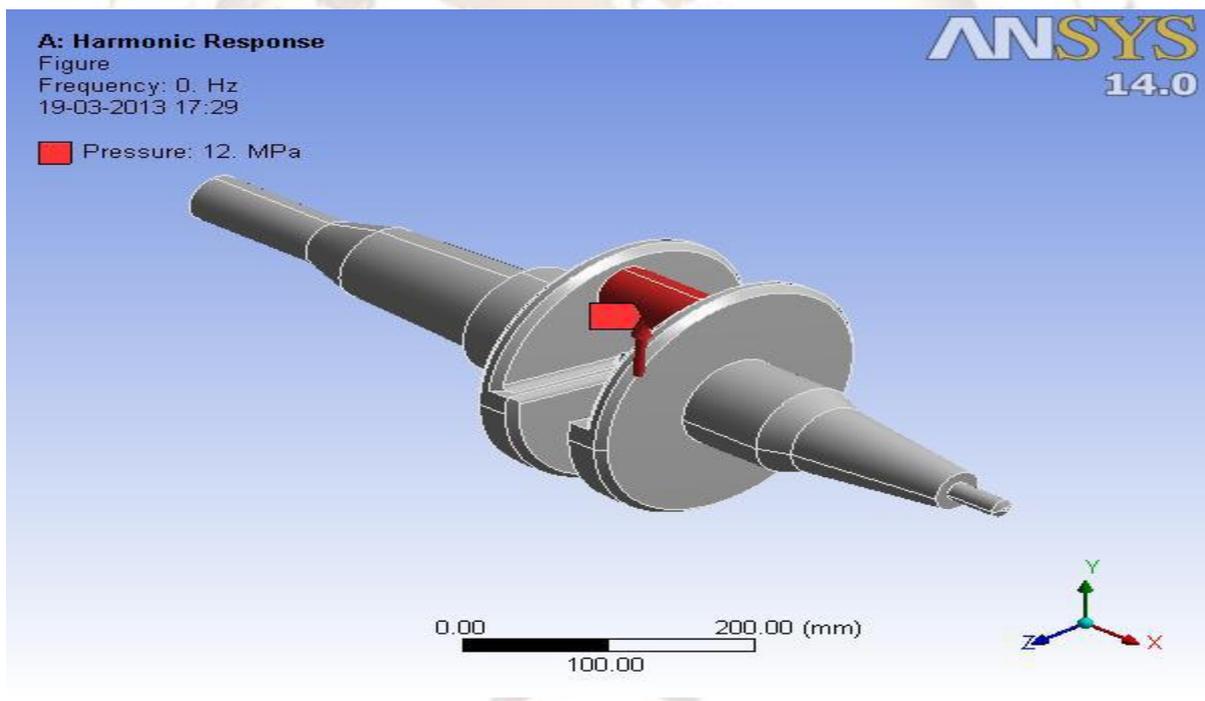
, Geometric model of crankshaft of single cylinder SI Engine
